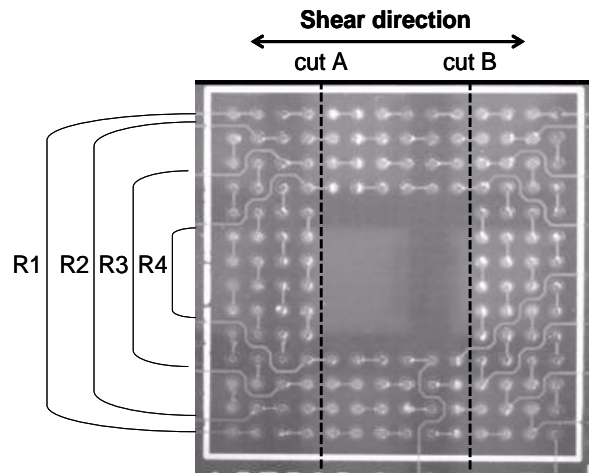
The image showing the cut line positions in the BGA solder assembly.
